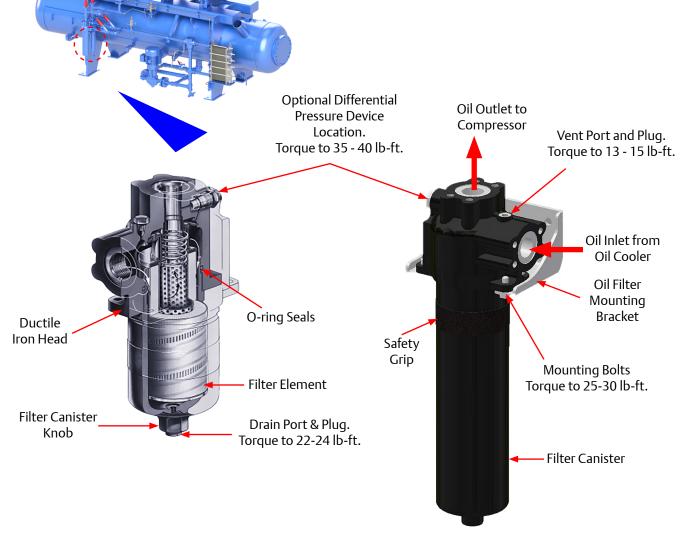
Filter Assembly (VPN 3677A Oil Filter Housing Shown)
